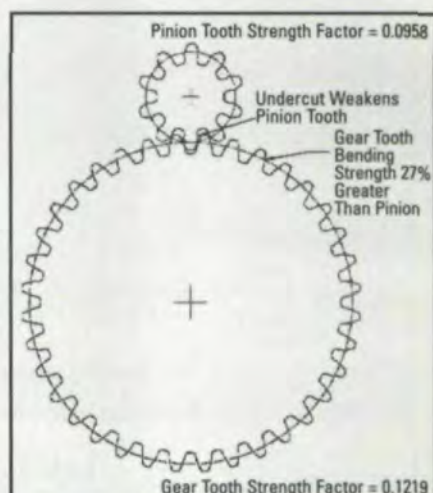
Standard addendum 10-tooth pinion with standard addendum 36-tooth gear.
